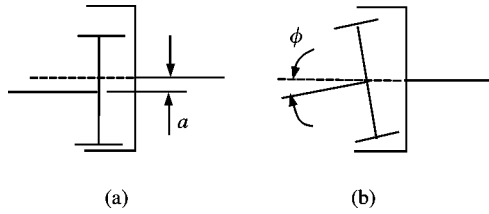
Misalignment of gear coupling: (a) parallel misalignment; (b) angular misalignment.
